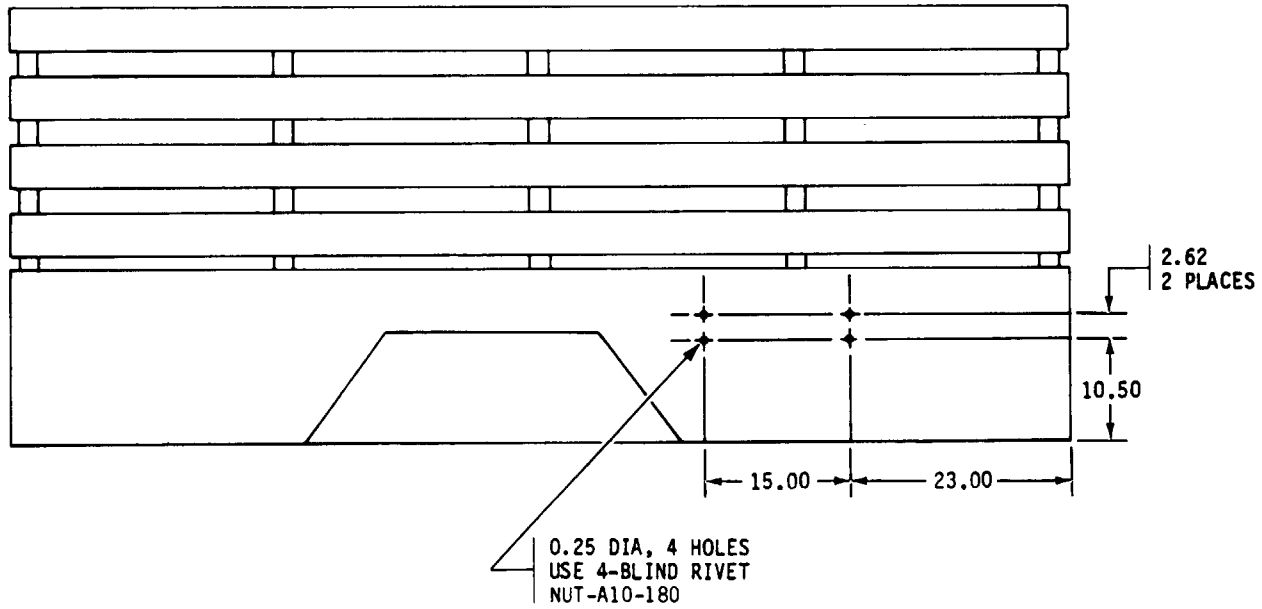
Hole Dimensions for Mounting Holes, Unit 5, M105A2, Floor Plan.
